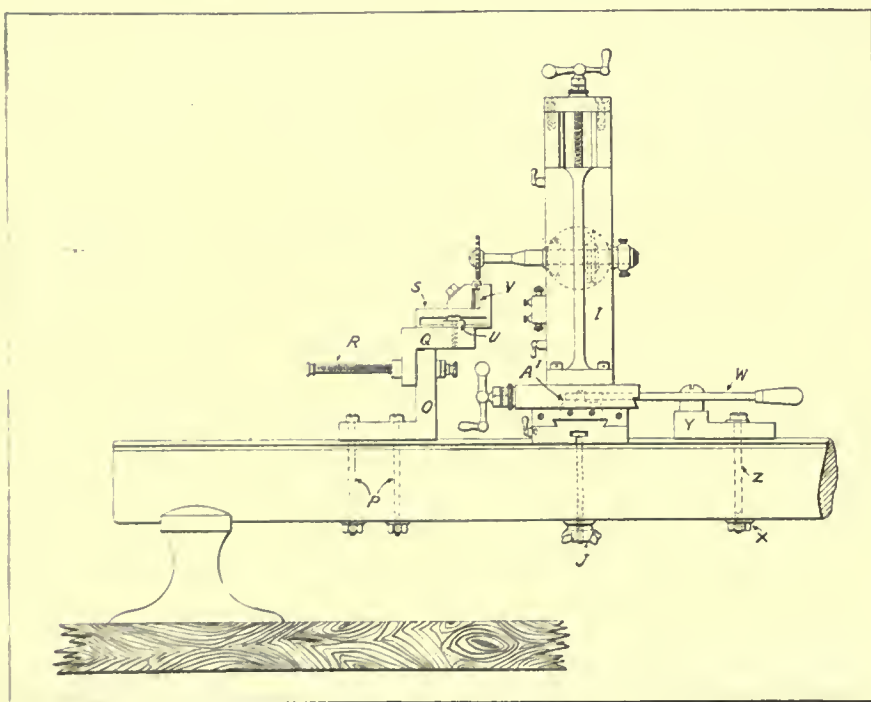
INTERESTING EXAMPLE OF BENCH LATHE UTILITY.
